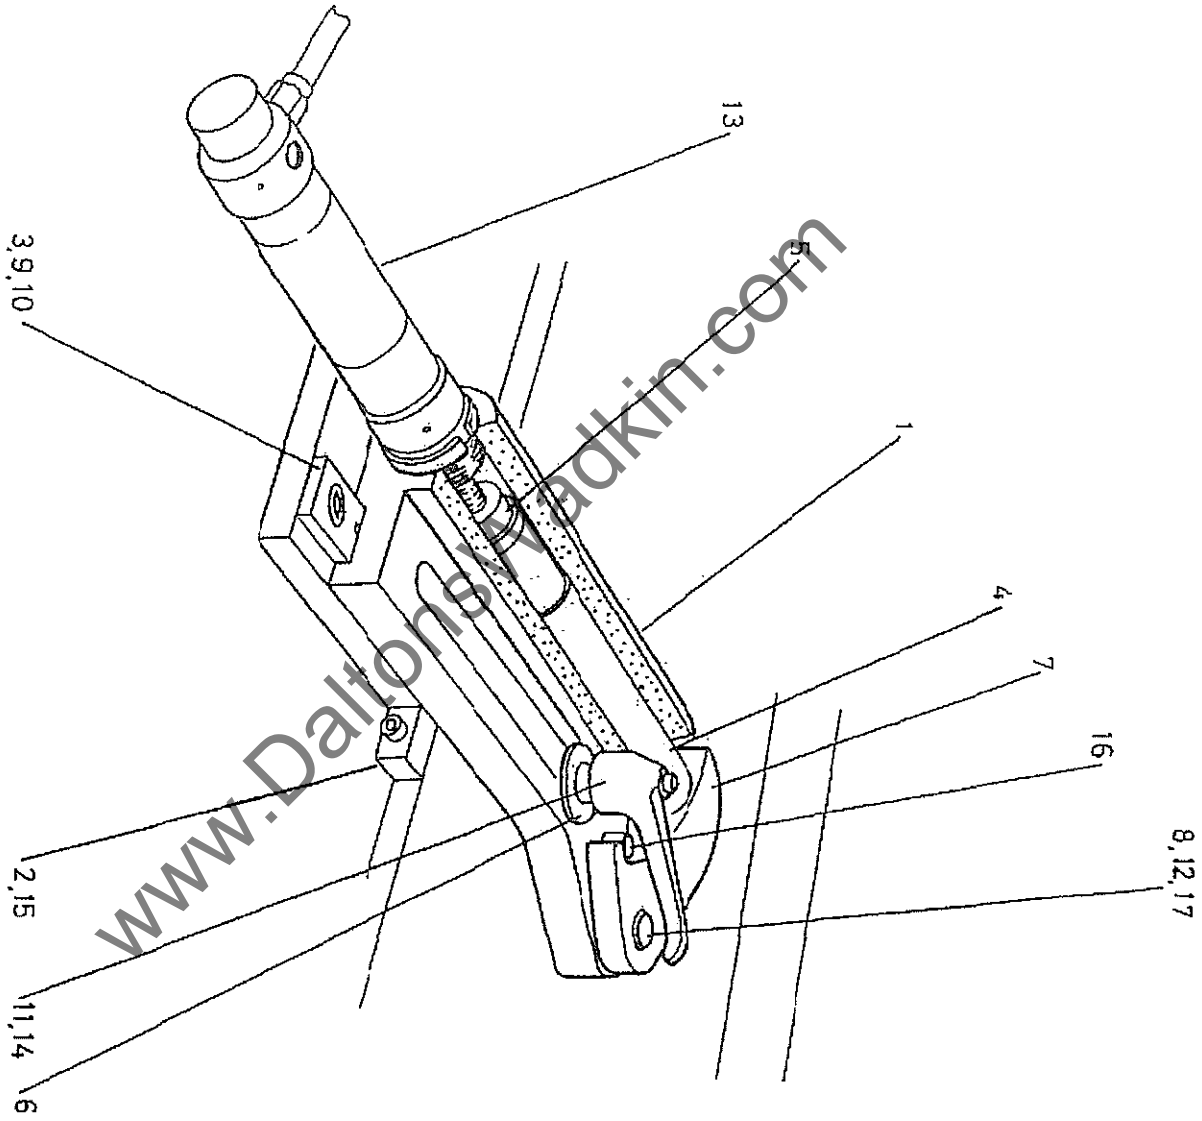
PNEUMATIC 'SKID' TYPE SIDE PRESSURE
